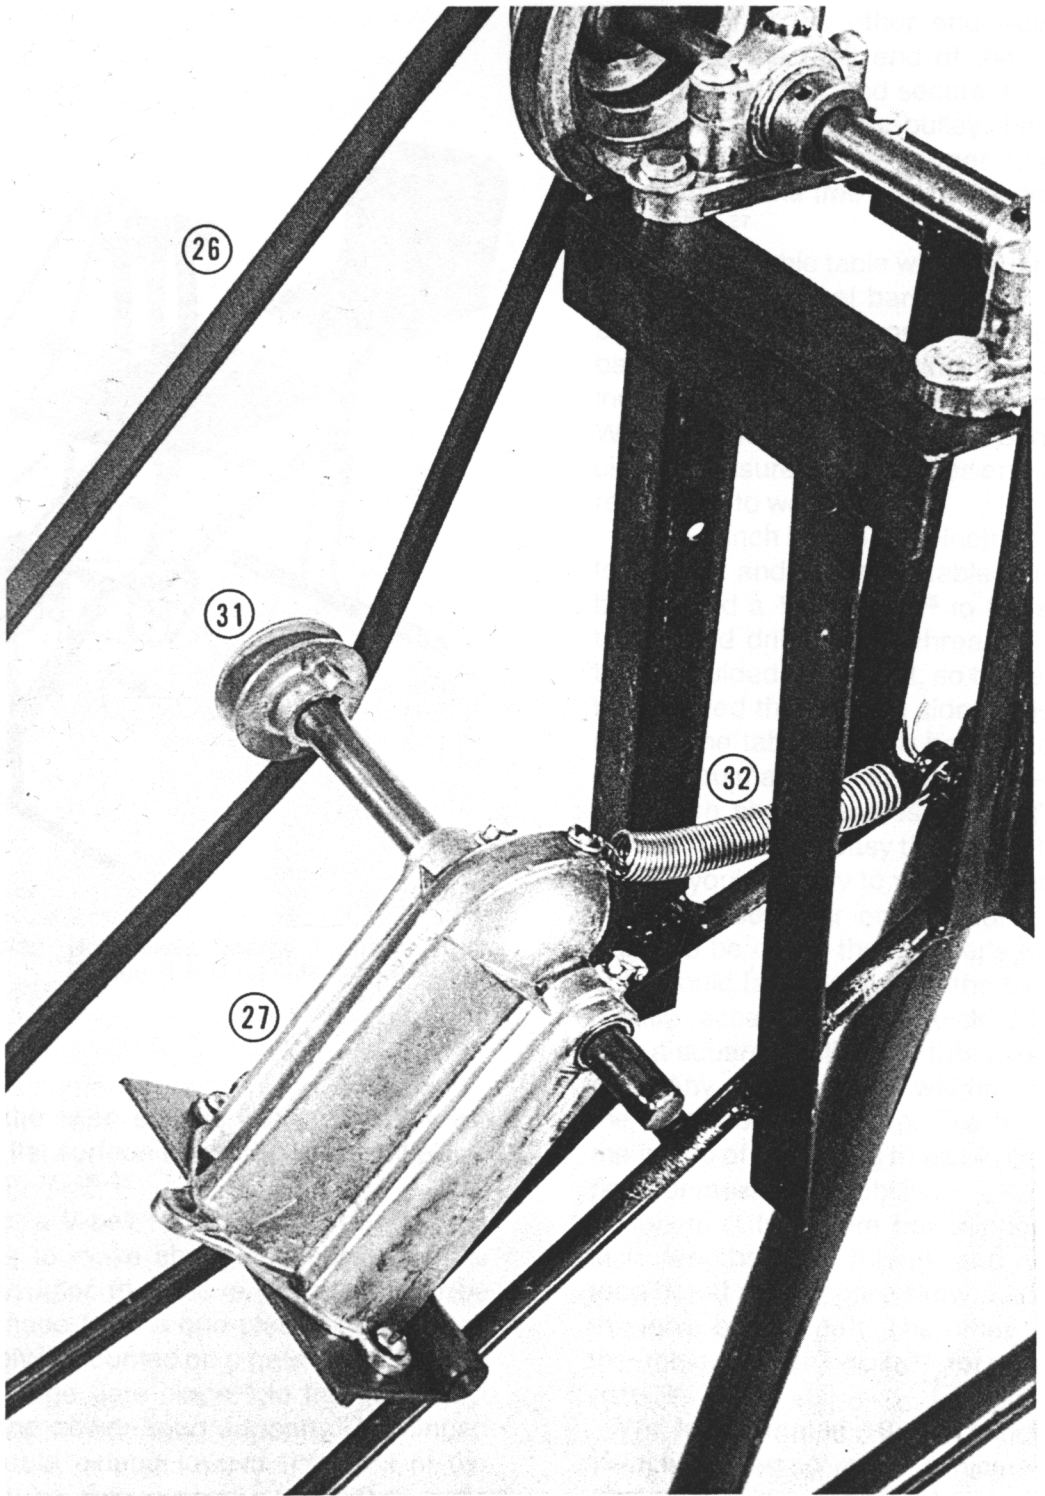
Research and Development personnel adapted a one-piece grinder shaft assembly to perform the task of an idler—a mechanism to remove slack from the V-belt.
